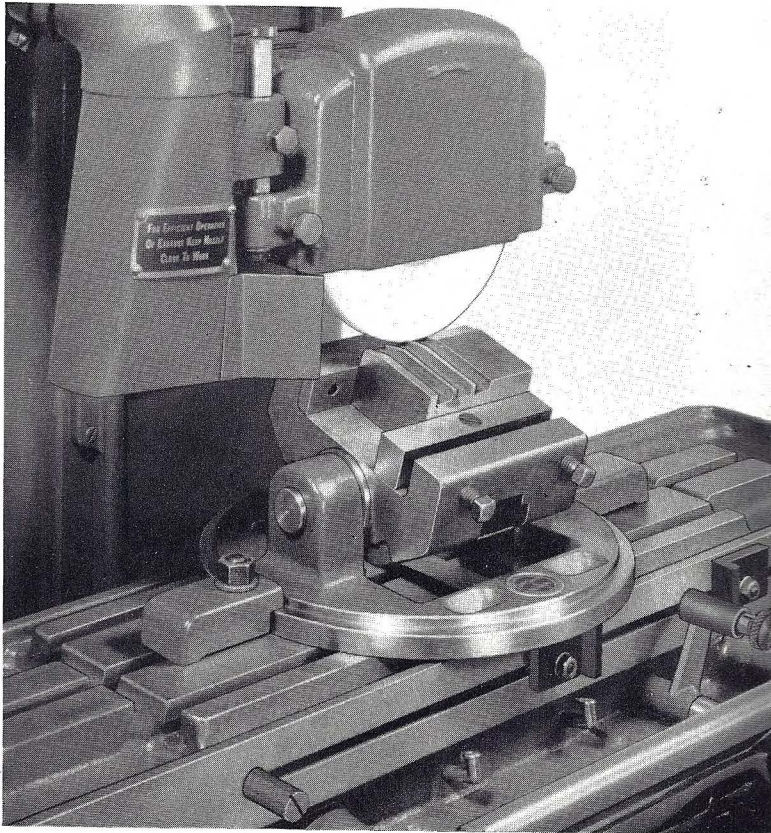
Angular flat surfaces are ground as readily as parallel surfaces. The piece illustrated is held at the required angle by an Adjustable Swivel Vise, which is clamped to the table with the jaws set approximately in line with the T-slots.
